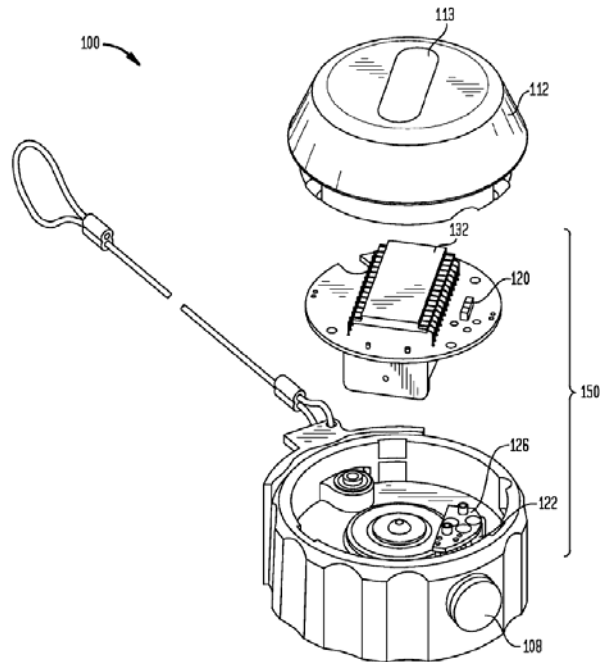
depicts valve assembly 100 and actuator 114 of the gas delivery device in communication via valve 107 with gas source 50. Figure 3 illustrates an exploded view of actuator 114 and valve assembly 100.
